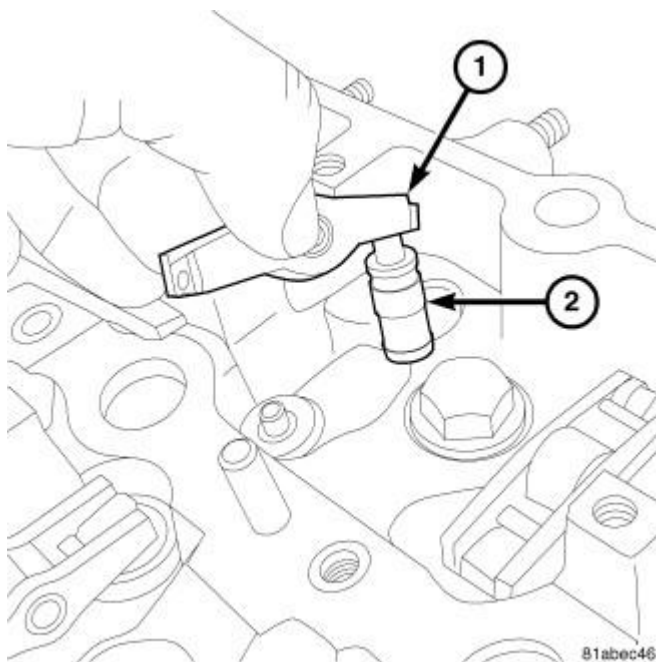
ROCKER ARM AND LIFTER ASSEMBLY
